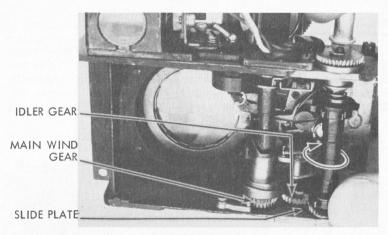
BACK OF FRONT PLATE/SHUTTER ASSEMBLY
